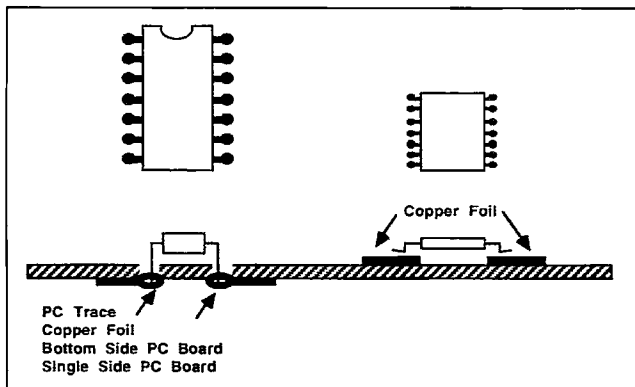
Standard 14-pin DIP, compared to a surface mount IC. The 14-pin DIP mounts through holes drilled in the PC board. Surface mount means just that—it is soldered on the component side of the PC board (no holes).
